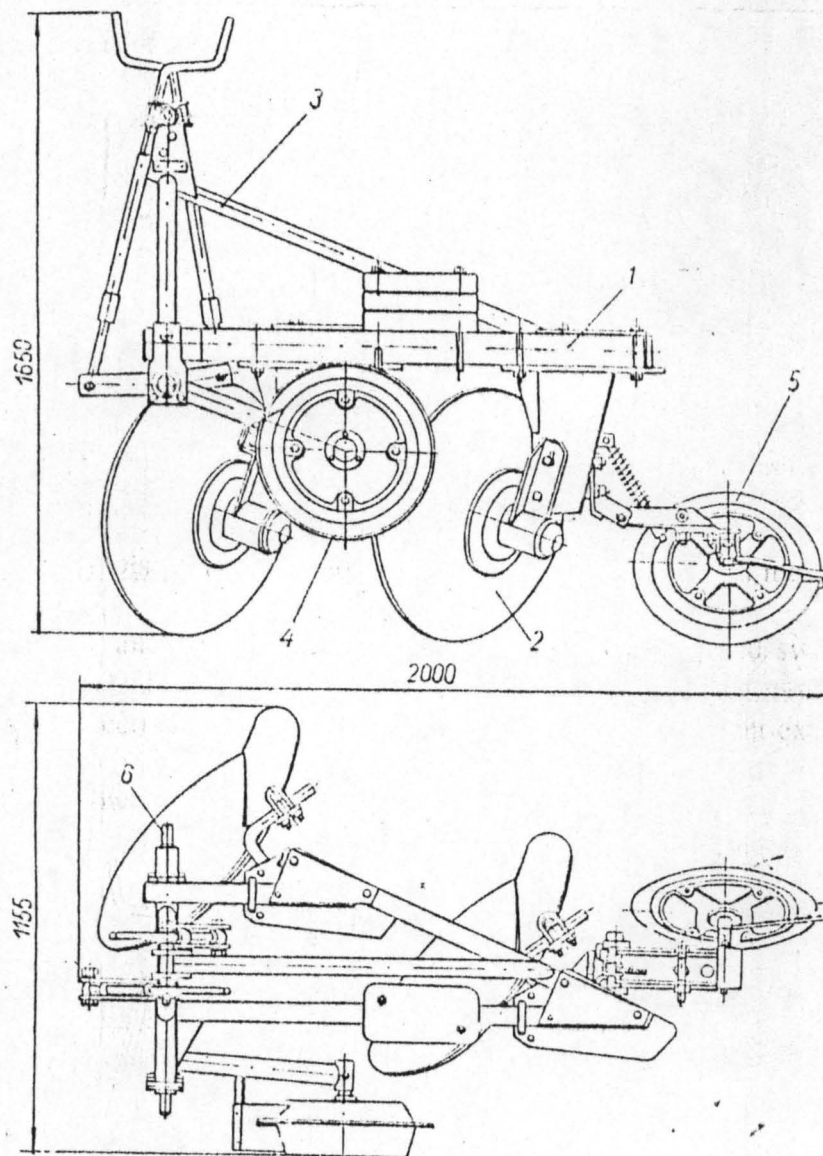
Mounted disk plow: 1—frame; 2—disk bottom; 3—column; 4—gauge wheel with collar; 5—rear furrow wheel; 6—shaft of mounting device.
